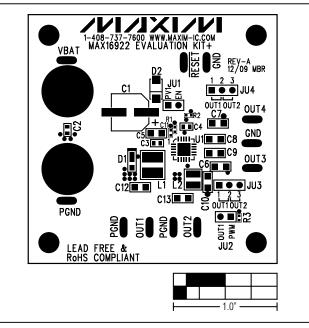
MAX16922 EV Kit Component Placement Guide—Component Side
